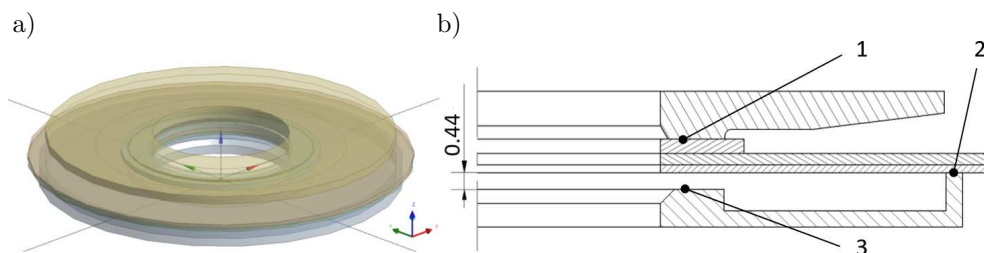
CAD model of a valve: a) 3D overview, b) a cross-section with the important surfaces.
